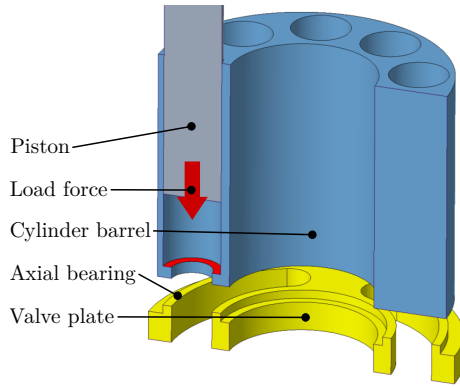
Load Force and Axial Bearing Between the Valve Plate and Cylinder Block [8].
